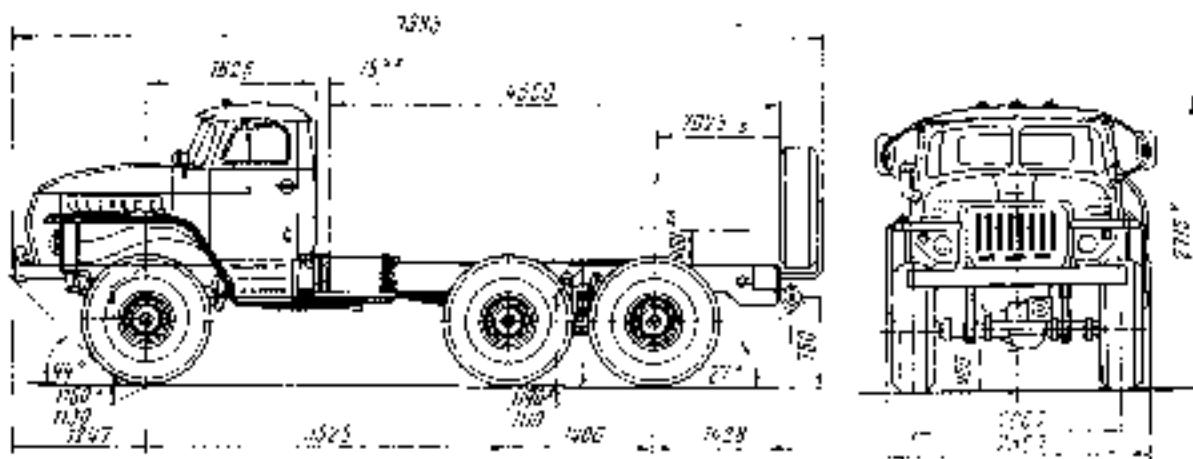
Overall Dimensions of Ural-43203-02 Truck Chassis
